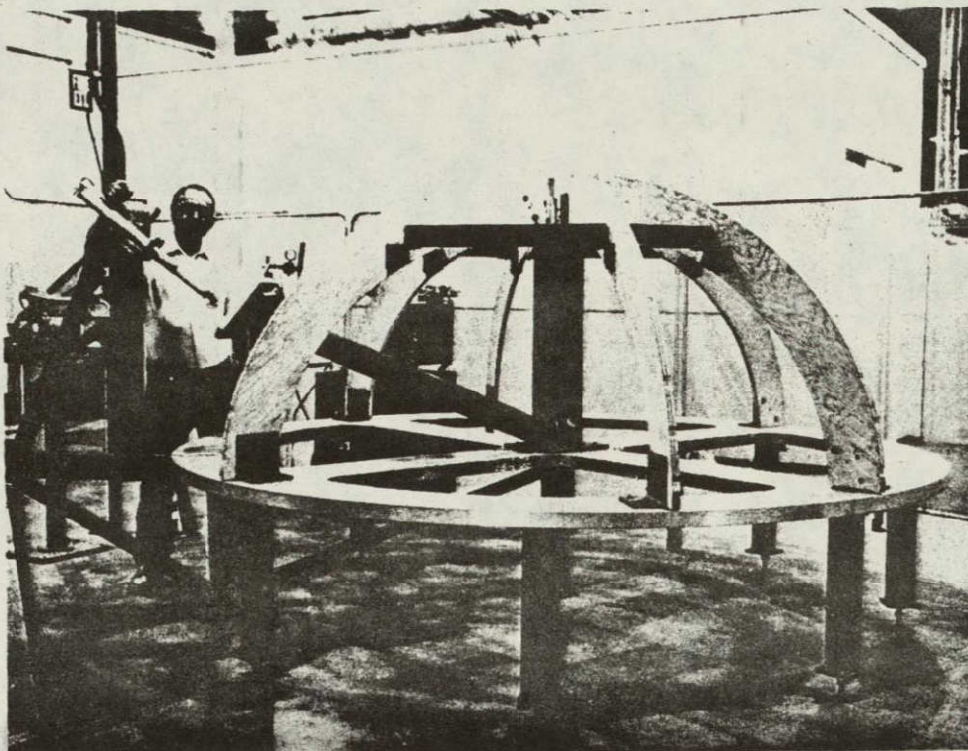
Sizing fixture modification for bracket welding.
